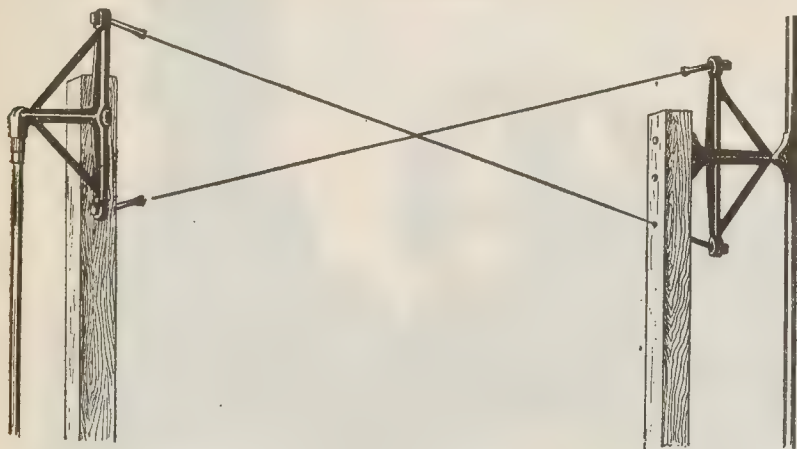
,811.—Butler triangles for transmitting motion of mill rod to pump when mill is located a distance from the pump. Connecting wires should always be crossed so the mill rod and pump plunger will work in unison, and the windmill will do the heavy work on up stroke.
